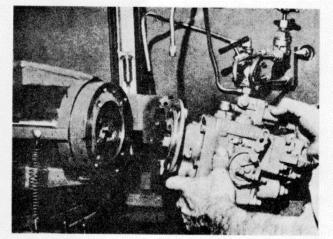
G-68. Mounting Fuel Pump with Buffer Type Drive
